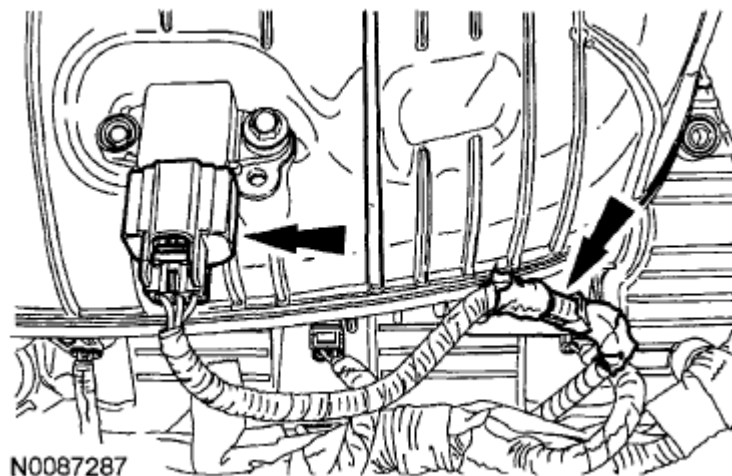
Locating Manifold Absolute Pressure (MAP) Electrical Connector And Wiring Retainer
